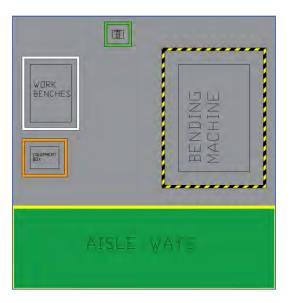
Placement of First Aid Kit and Floor Marking Tape
